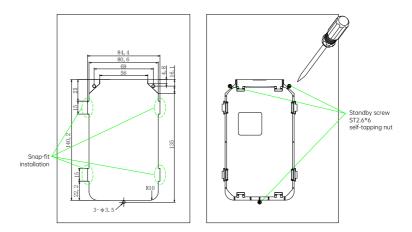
Mounting hole dimensions of large-size operating panel mounting base (unit: mm)
